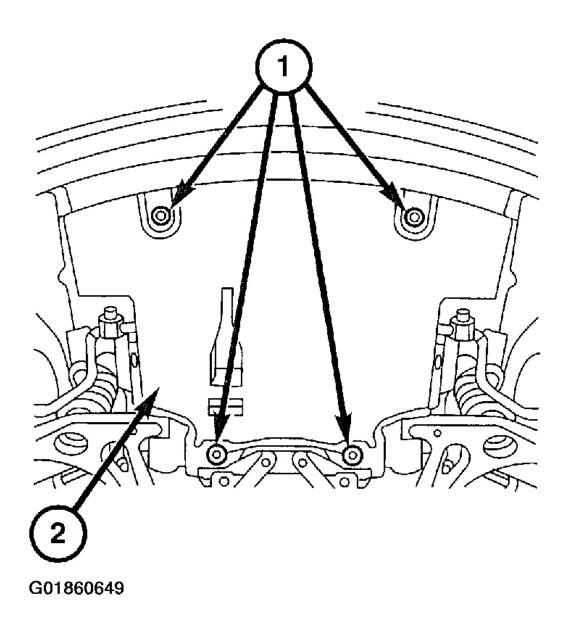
Installing Lower Splash Shield & Screws Courtesy of DAIMLERCHRYSLER CORP.
